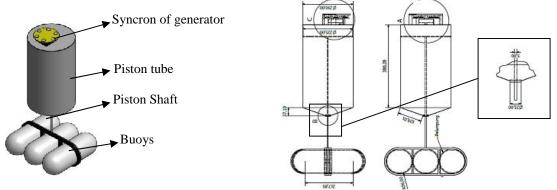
Piston and Generator Figure 2 Dimensions of Component Piston and
